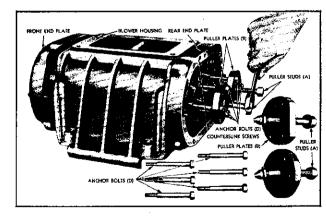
Pressing Rotor Shafts from Rear Bearings and Front End Plate from Housing.
